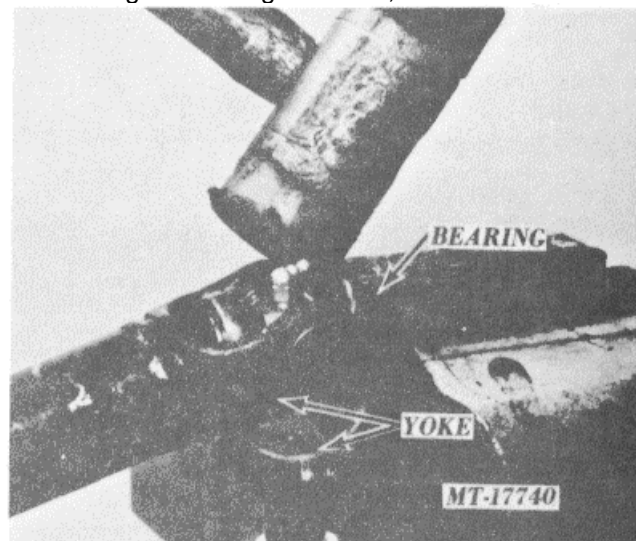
Bearing Removal (Bearing in Vise Use Copper Jaw Covers on Vise)
